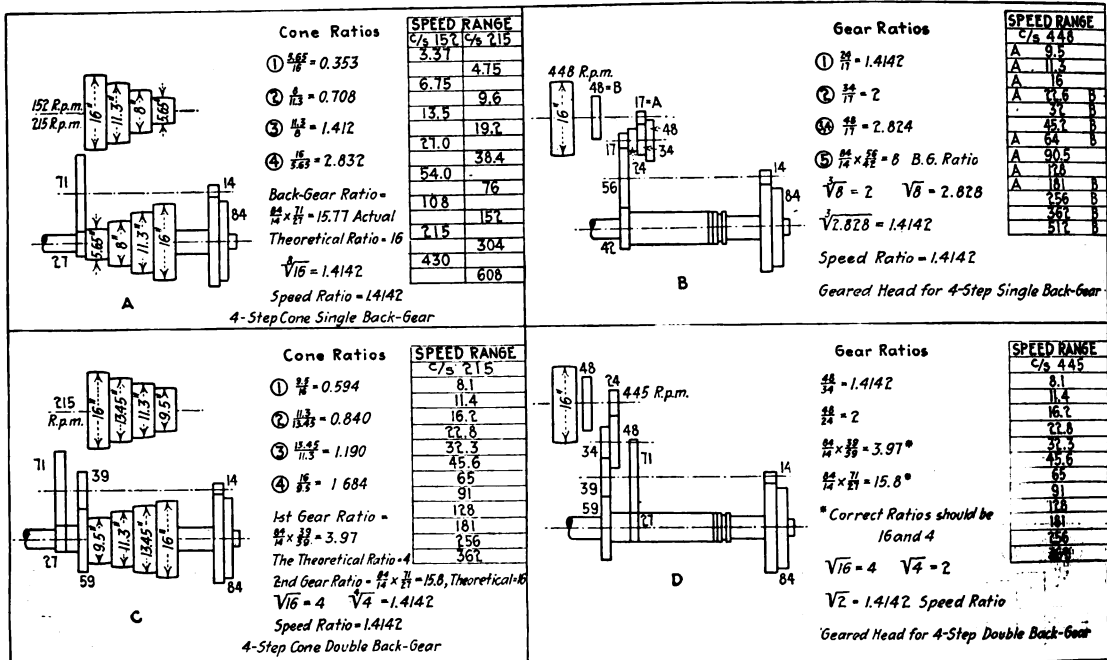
CONE AND GEAR DIAGRAMS FOR FOUR STEPS AND BOTH SINGLE AND DOUBLE BACK GEARS
